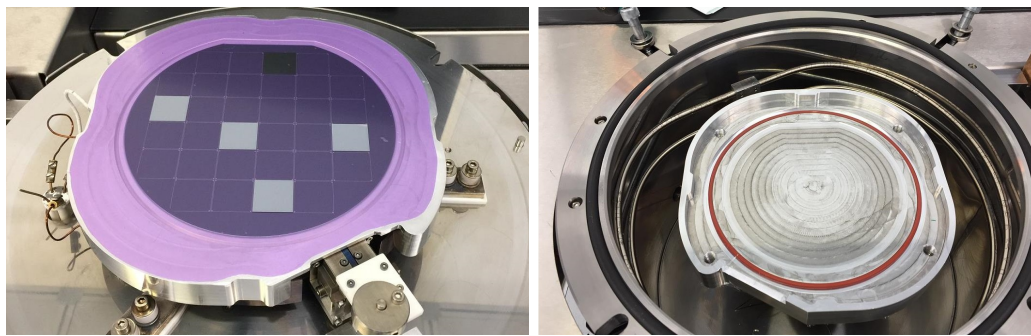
The mold is made of two engraved parts: a bottom side (left) and a top side (right).
